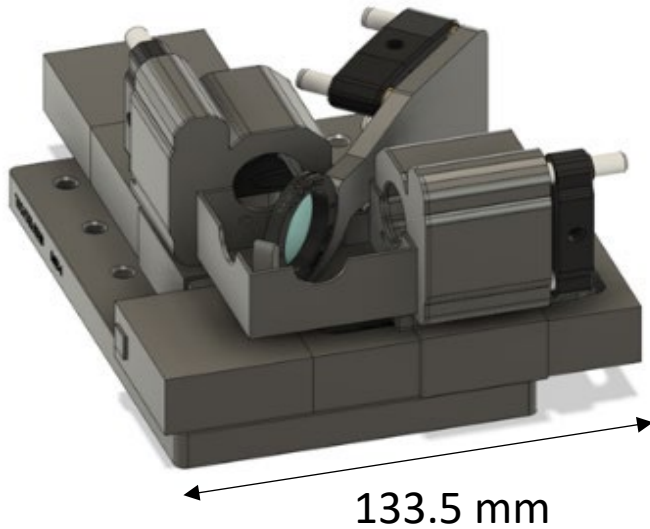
CAD model of the assembled interferometer. Fusion 360 CAD software was used.
